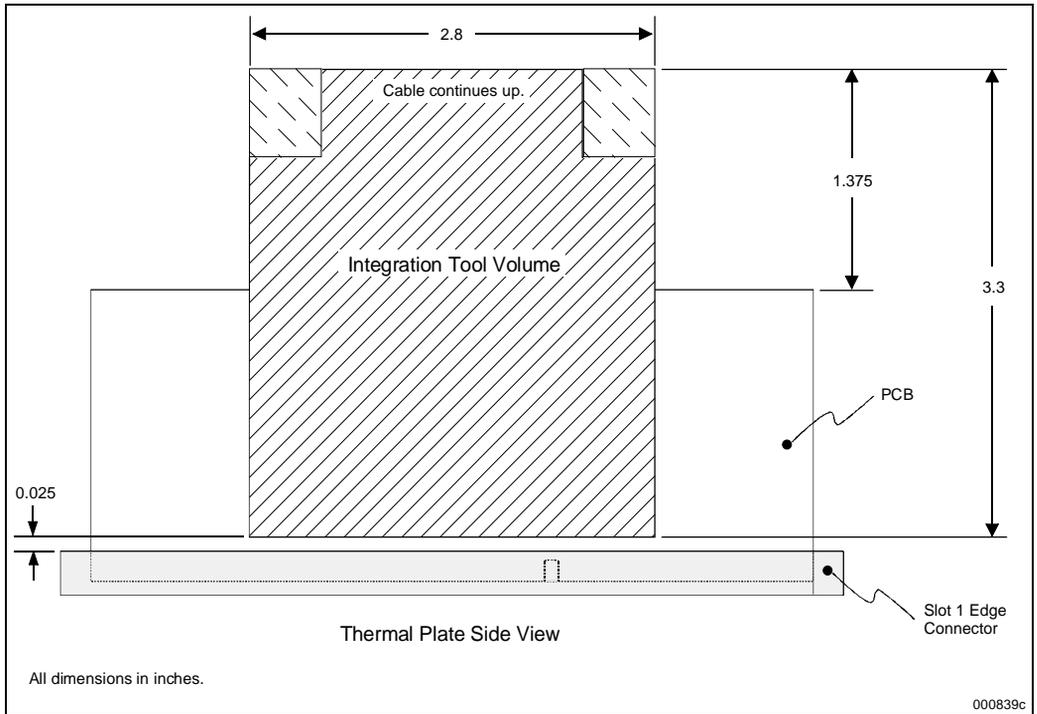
Pentium® II Processor Integration Tool Mechanical Keep Out Volume—Thermal Plate Side View
